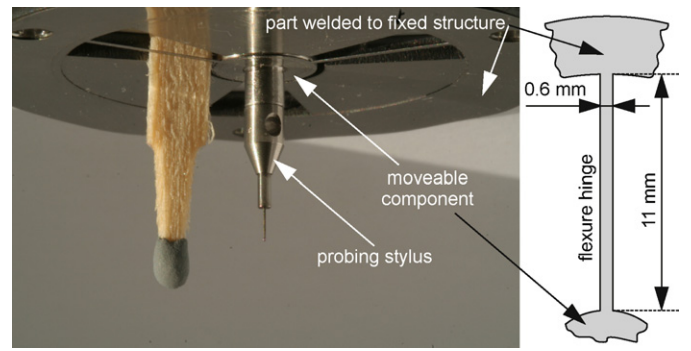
Manufactured probing head with match for comparing the scale and dimensions of the flexure hinges.
